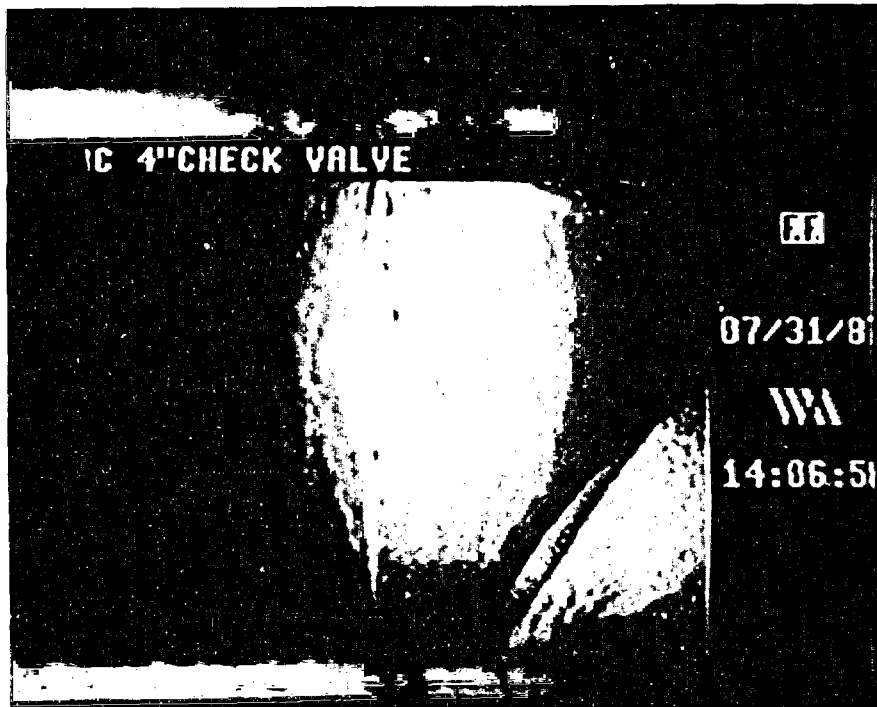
Four-Inch Check Valve In-Service Inspection--Clapper Pin Area
